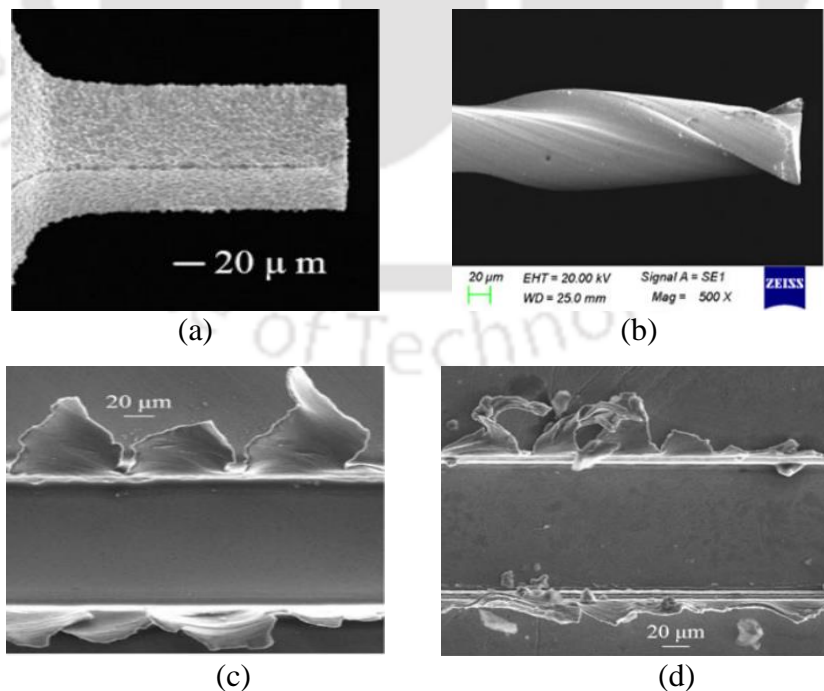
(a) Fabricated tool (b) commercial tool, and fabricated micro-channel with (c) fabricated tool (d) commercial tool [25]
